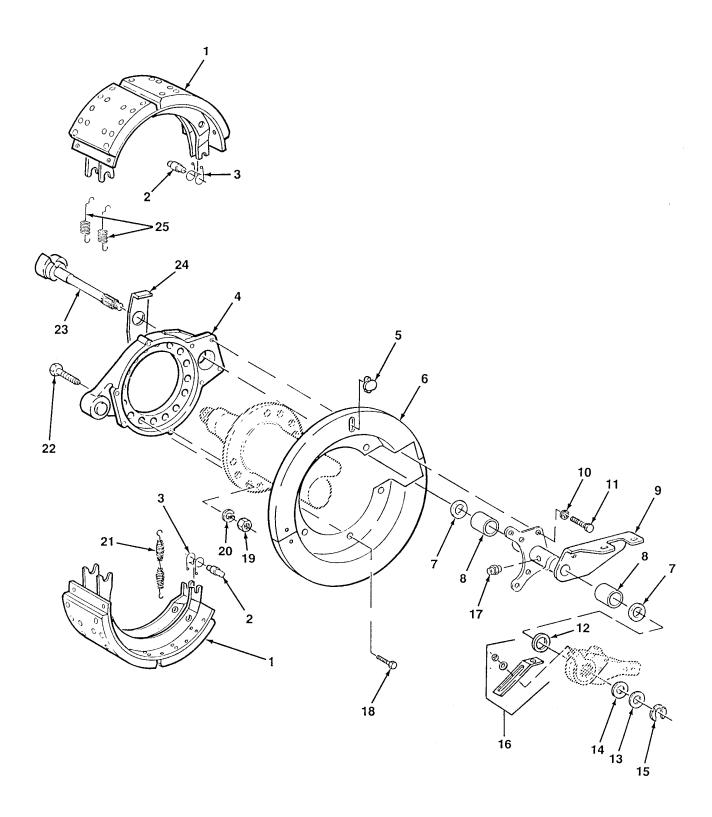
A. Front and Rear Brake Assembly Serial Numbers 2001 and Up
